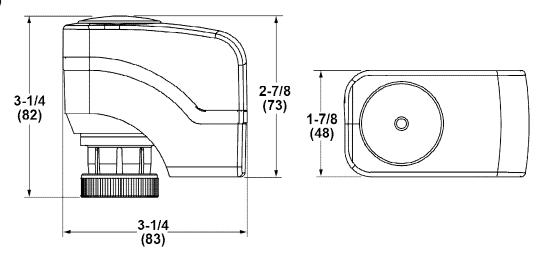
Dimensions of the SSA/P Series Actuator in Inches (mm).
